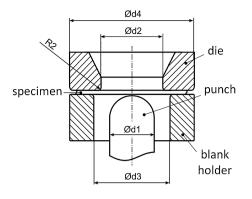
Dimensions of tools used in the Erichsen cupping test: d1 - 20 mm, d2 - 27 mm, d3 - 33 mm, d4 - 55 mm, R2 - 0.75 mm
